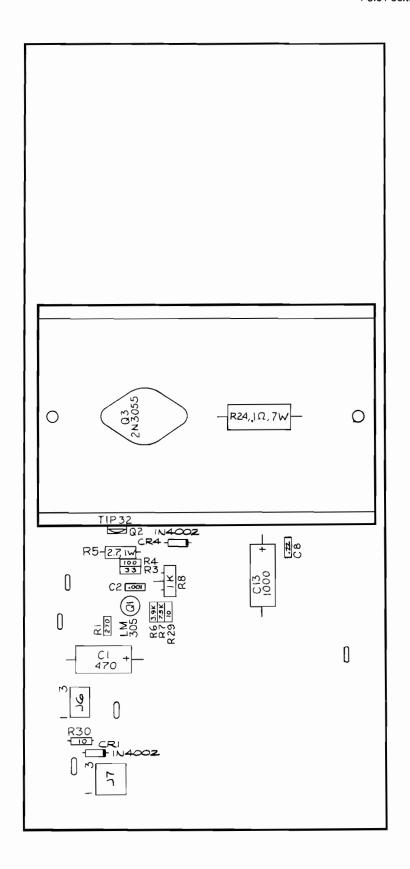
Regulator/Audio II PCB Assembly Ireland-Built Cabinet A035435-05 A
